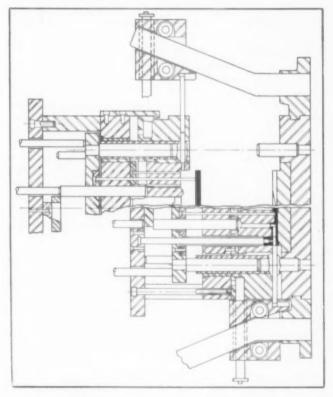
In the part above, it is required that the surface be almost as flat as a machined surface, yet bosses prevented machining of the surface. A number of complications in ejecting arose, necessitating a rather intricate ejection design.
